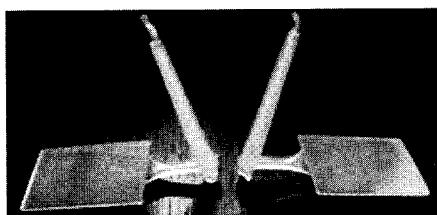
Injection molded parts (Left : Hybrid, Right : Hydraulic)
